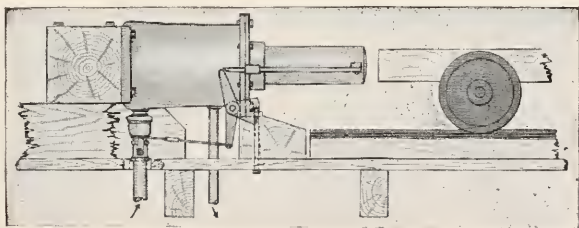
A Combination Steam and Pneumatic Carriage Bumper.
